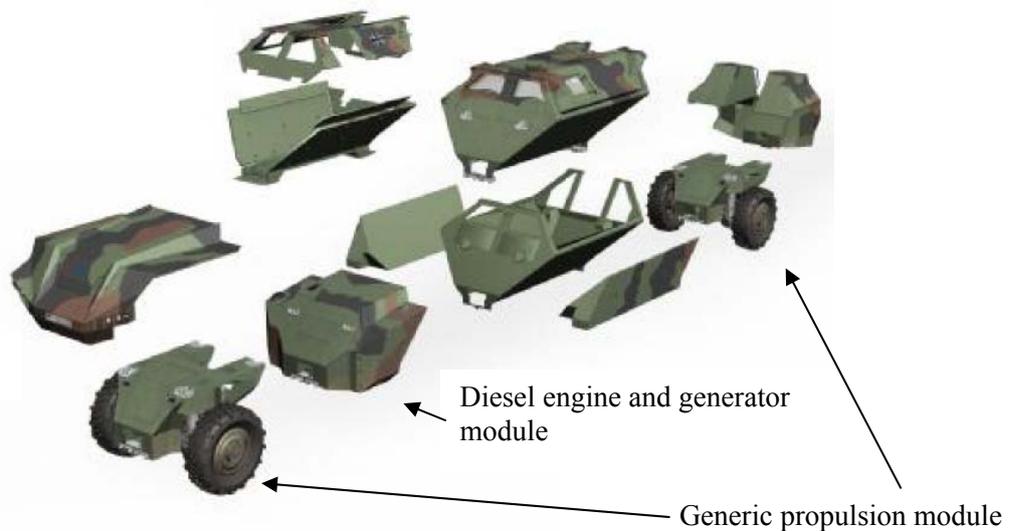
Exploded view of the modular Rheinmetall Gefas concept [11]
